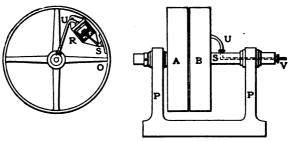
Diagram Showing Pulleys, Pistons, and Shaft of Flather's Dynamometer.
